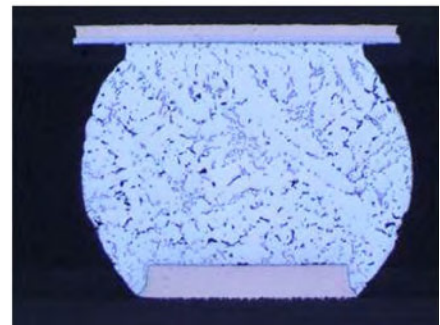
BGA solder joint: hot profile, lead-free alloy in a tin/lead process.
